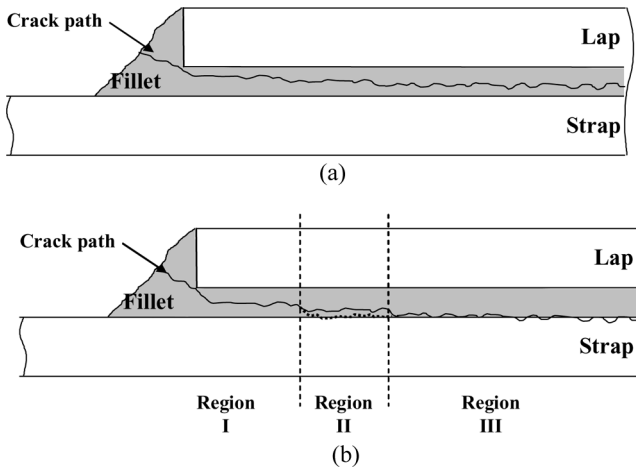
Crack path schematic, showing: (a) cohesive fracture in adhesive and (b) a mixed-mechanism fracture path.
